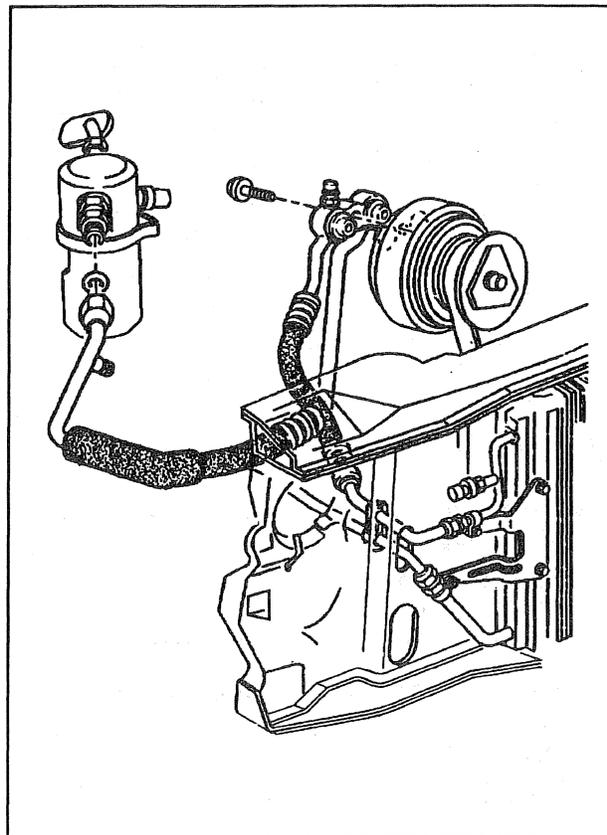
Compressor and Condenser Hose Assembly (7.4L Engines w/o Aux. A/C)
